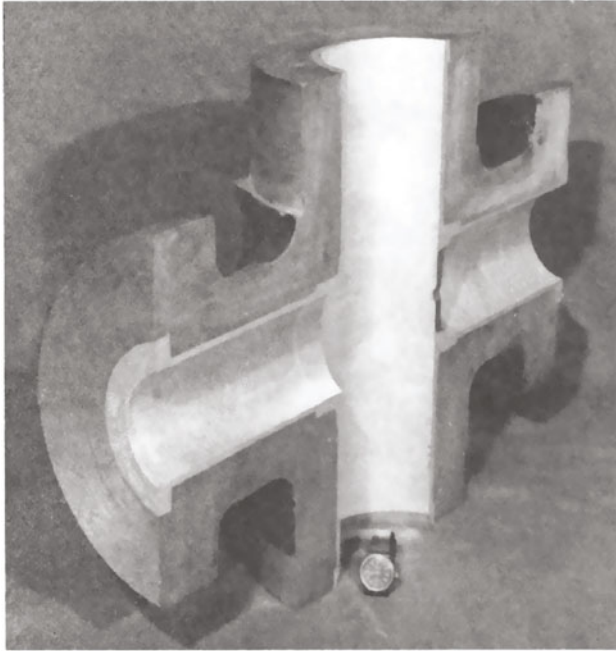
"HIP-clad" body parts with corrosion-resistant layer
